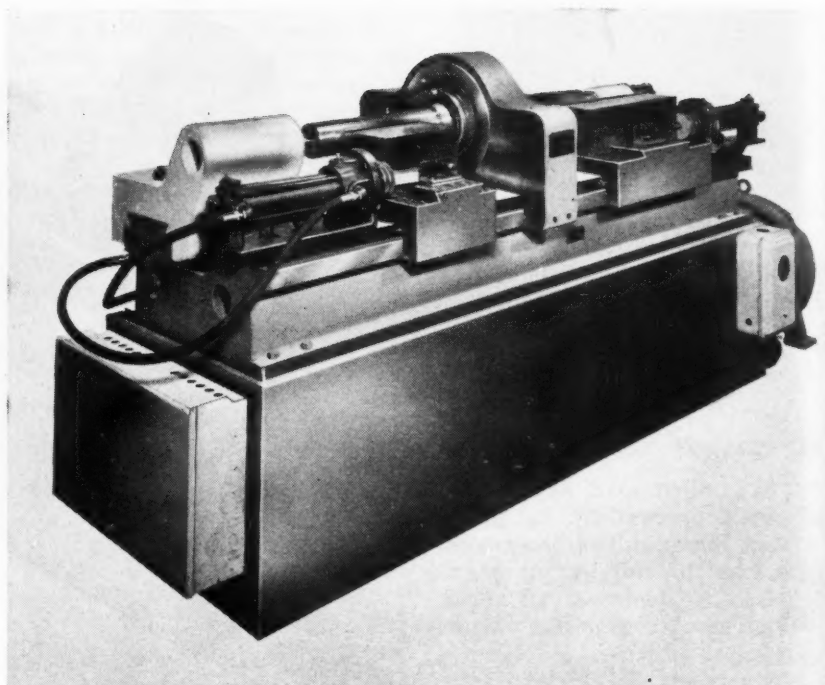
Benjamin Automatic Double-end Shaft-turning Machine
